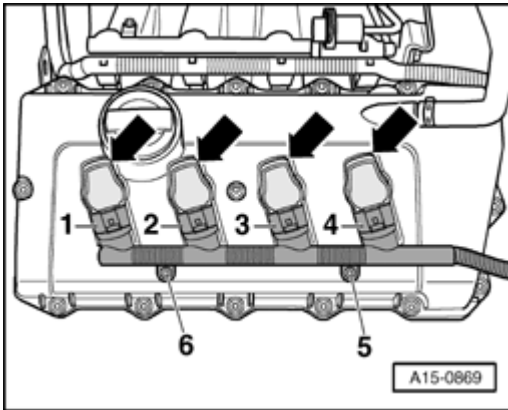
Removing Bolts On Left Cylinder Head, Disconnecting Electrical Harness Connectors & Removing Ignition Coils
